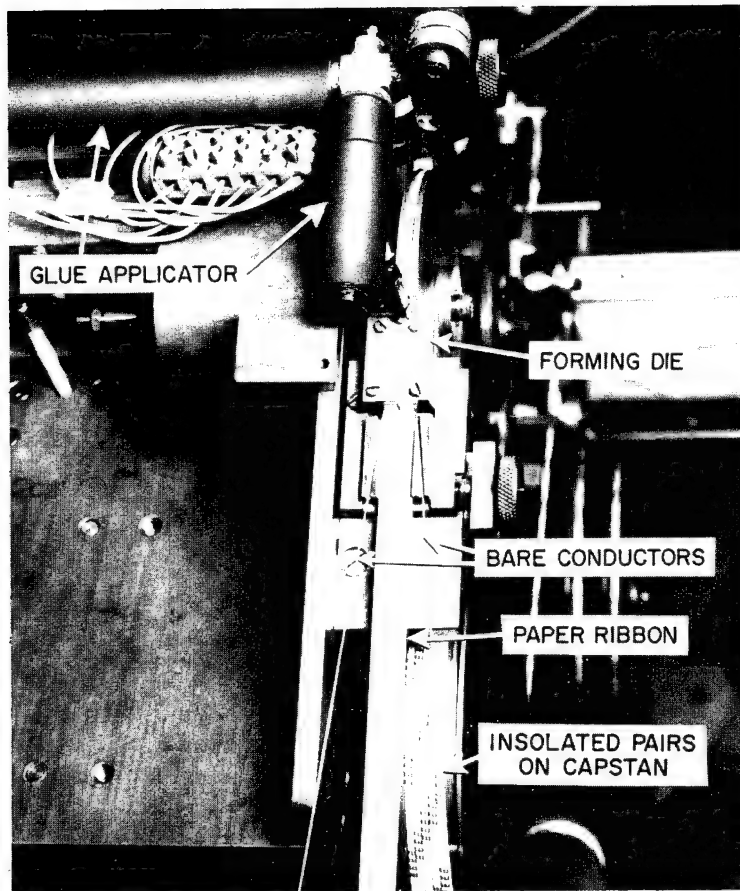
Close-up of forming tool for "B" type SPT insulated with key machine elements labeled.
